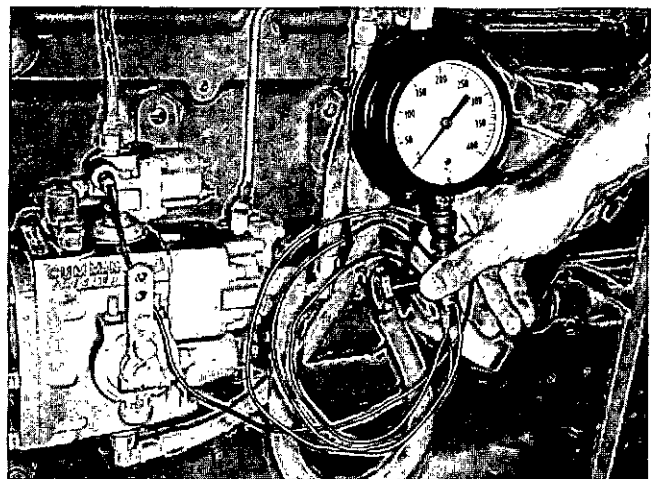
, N11966. Checking fuel manifold pressure ST-435
